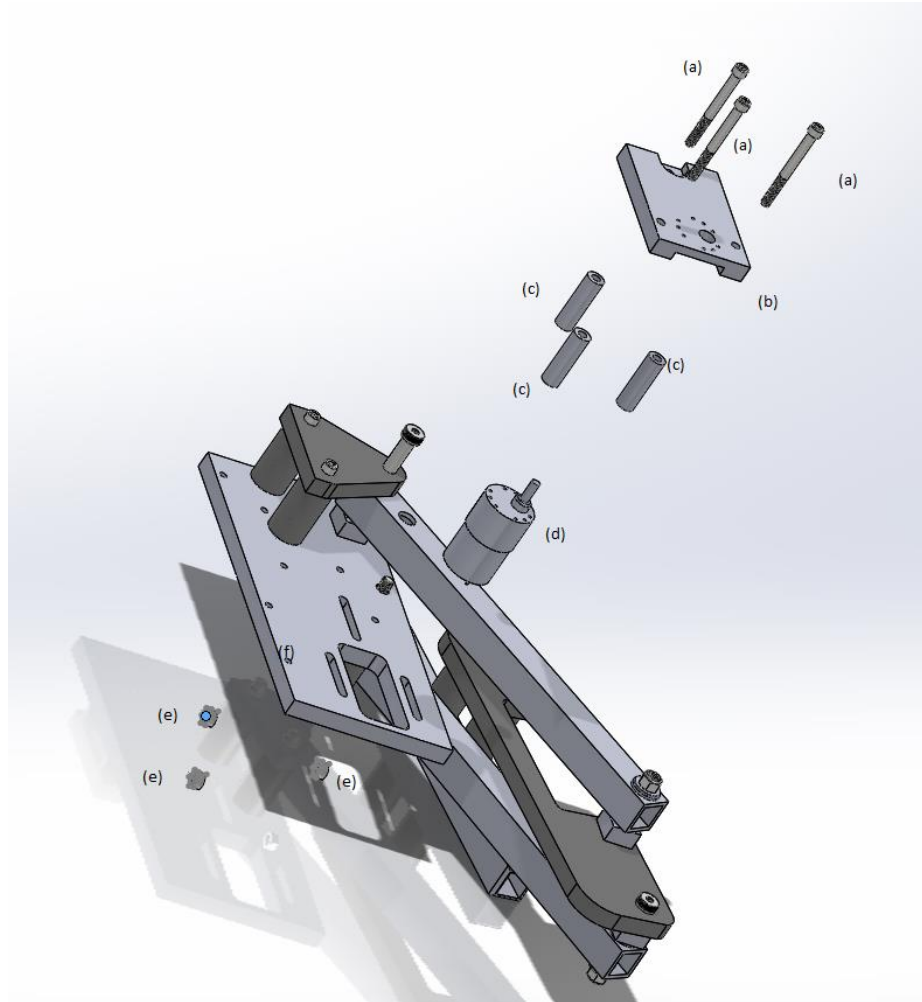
Step 1&2 exploded view of motor mount attachment
